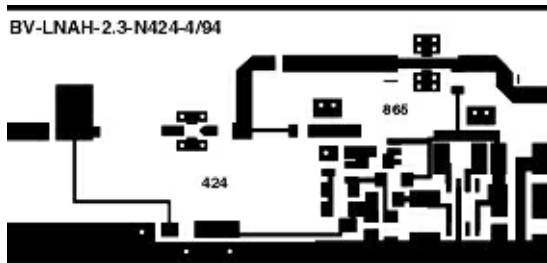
PCB layout for 13cm PHEMT. PCB dimensions are 34 x 72mm
